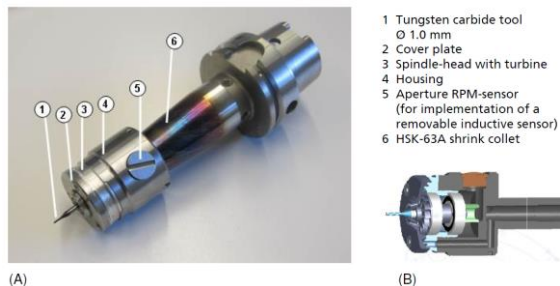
Overview of the second spindle prototype mounted in holder (A) and cross section view (B).
